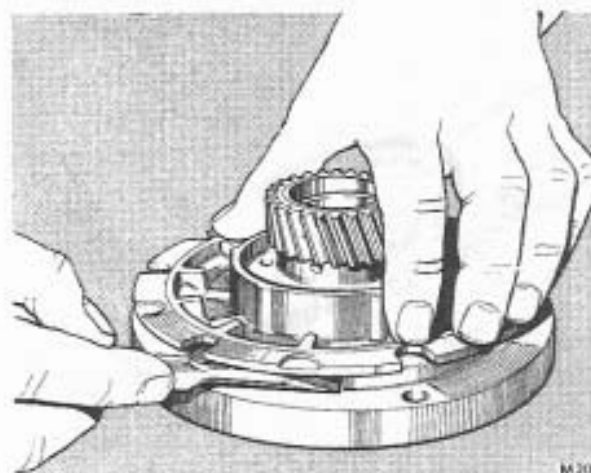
FITTING EXPANDER AND SEAL TO CLUTCH COVER
